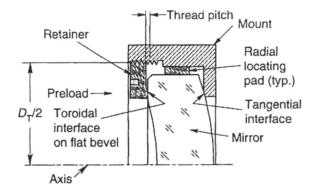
Conceptual configuration of a threaded retaining ring mounting for a second surface mirror.
